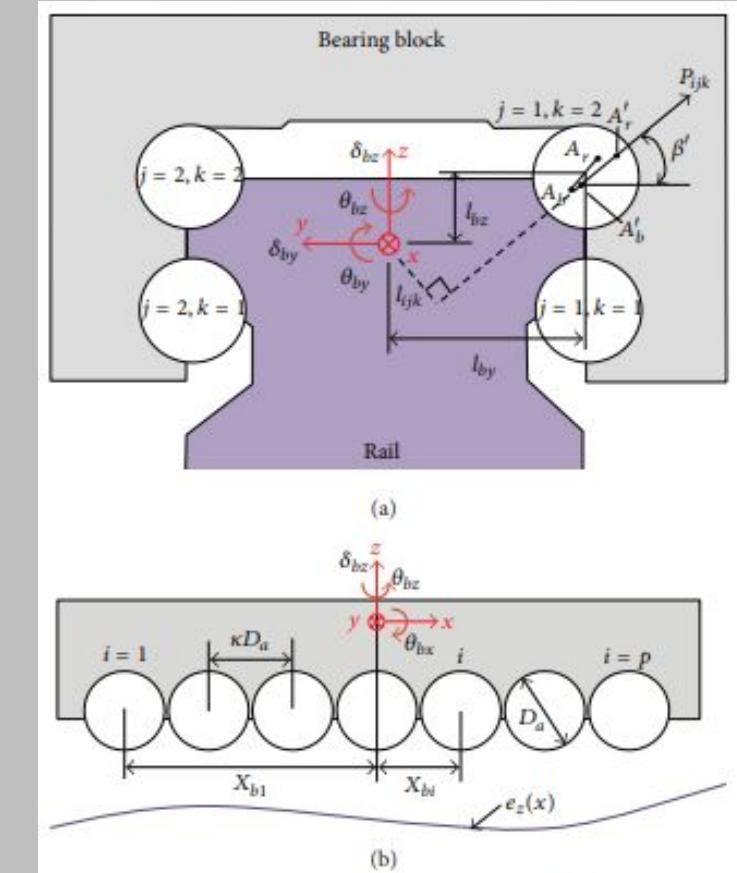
Model of a linear motion bearing block. (a) Front view and (b) side view.
